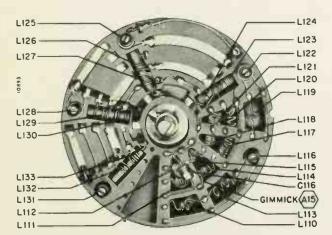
View of Oscillator-Mixer Rotor Disc in VHF Tuners 94E144-13, -19, -24 and -26.
